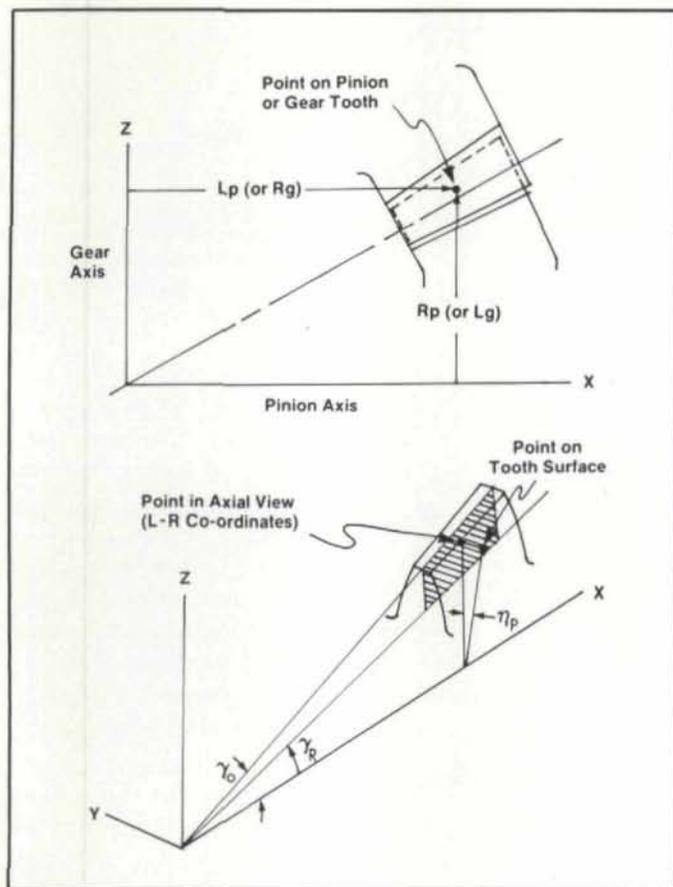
Method of Generating Points on Tooth Surface based on Co-ordinates in Axial Section
